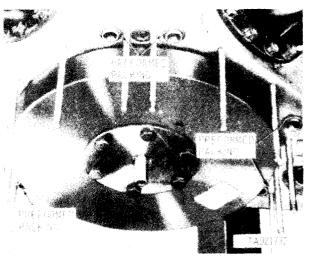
Front end of crankcase assembly showing locations of oil transfer tube preformed packings.
